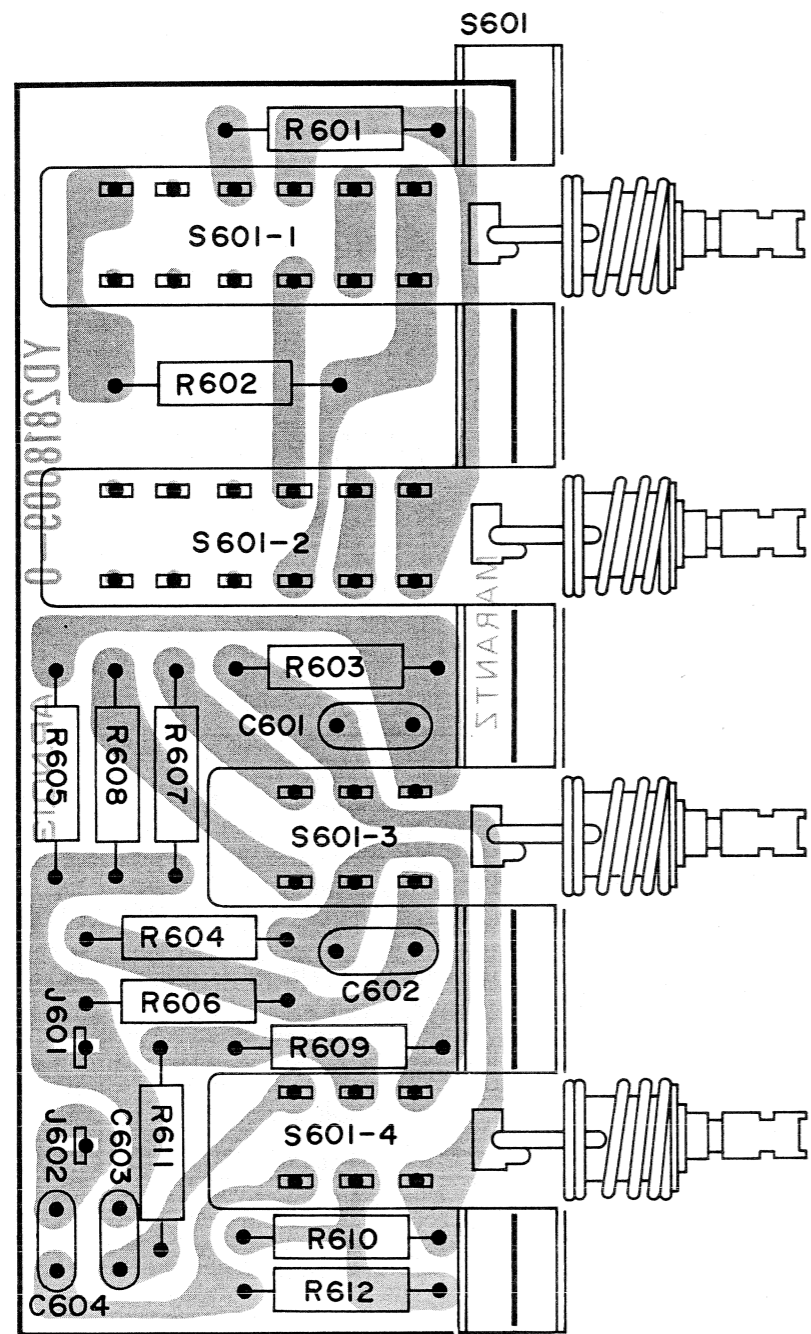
Mono, High and Low Filter Switch Unit Assembly P600 Component Locations
